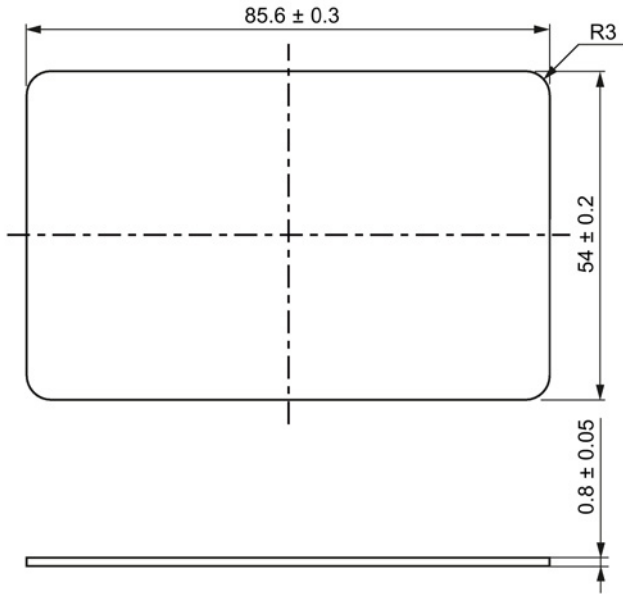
Dimensional drawing MDS D400 (dimensions in mm)
